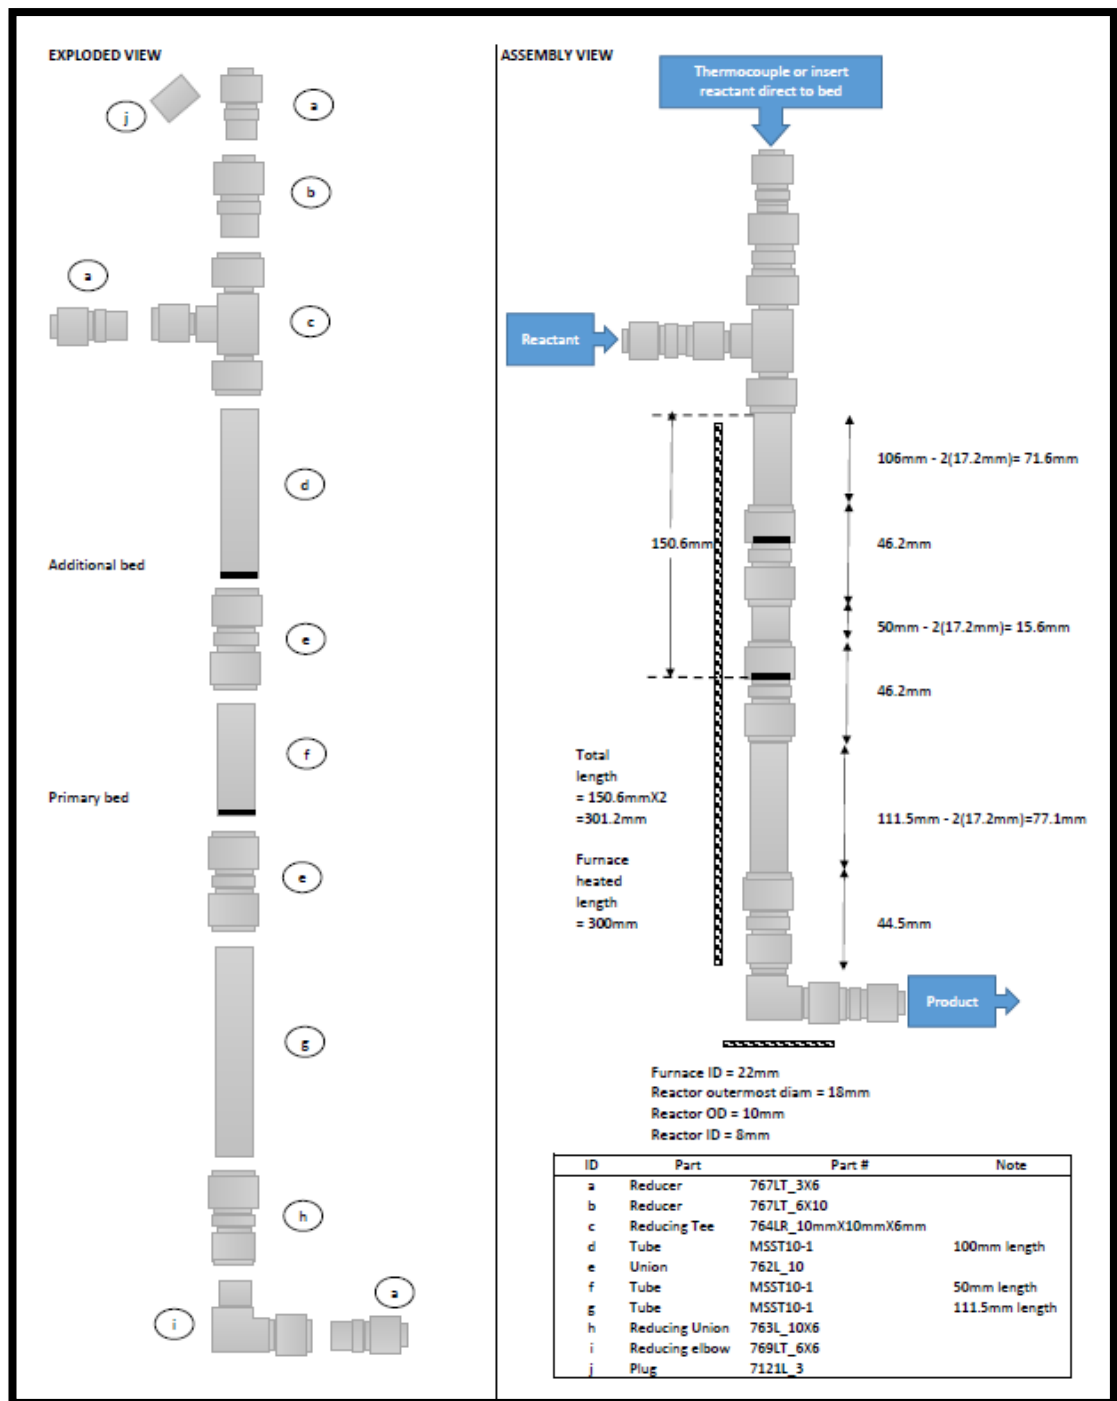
Exploded-view drawing of the packed-bed reactor.
